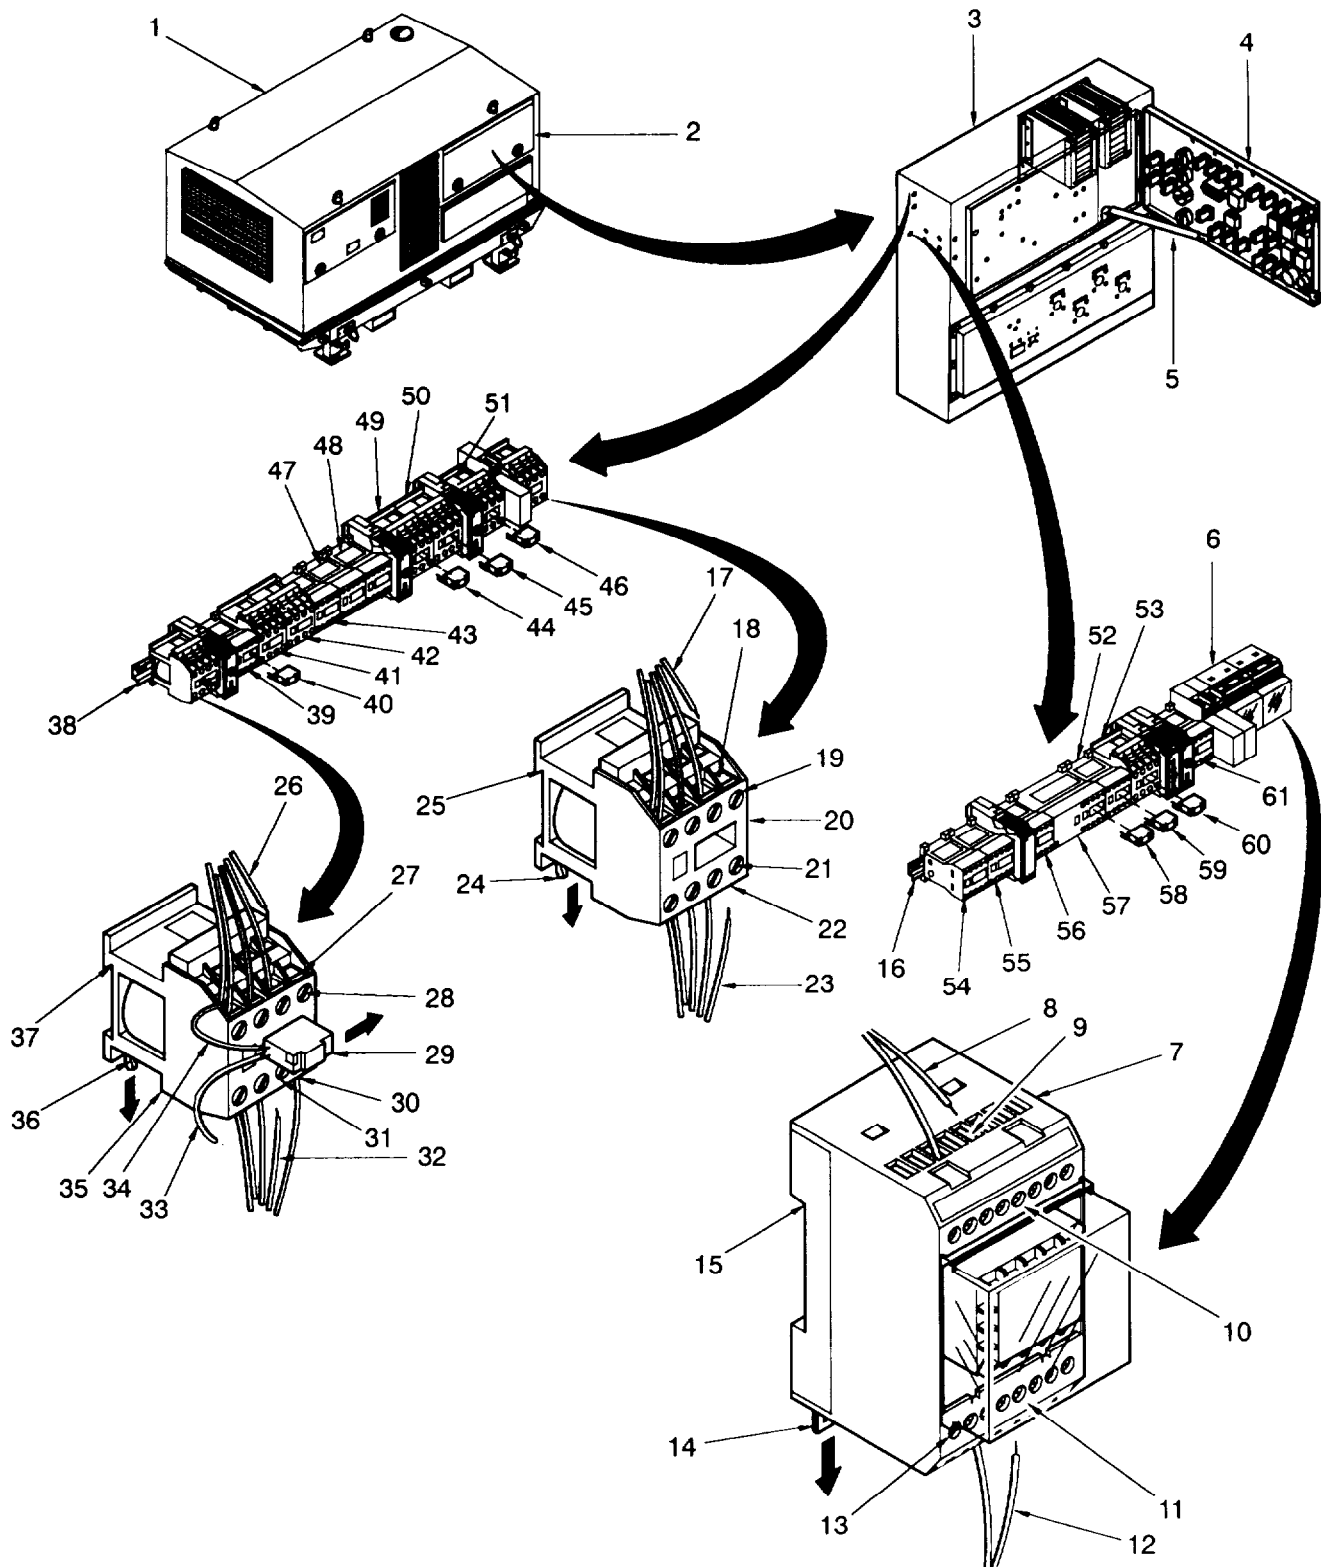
Control Cabinet Assembly, Auxiliary Contactor with Semiconductor, Auxiliary Contactor, Transformer Maintenance
